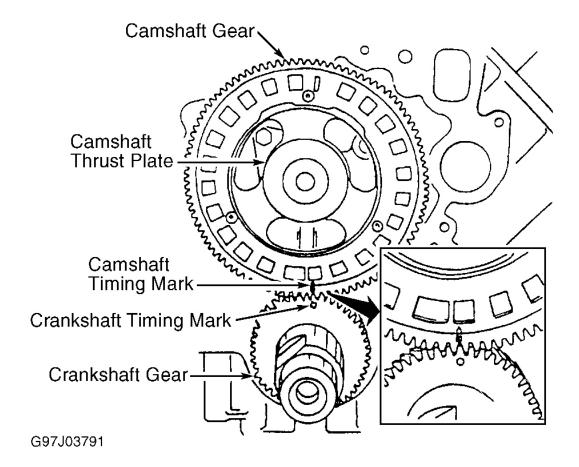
Aligning Timing Marks & Locating Camshaft Thrust Plate Courtesy of FORD MOTOR CO.
